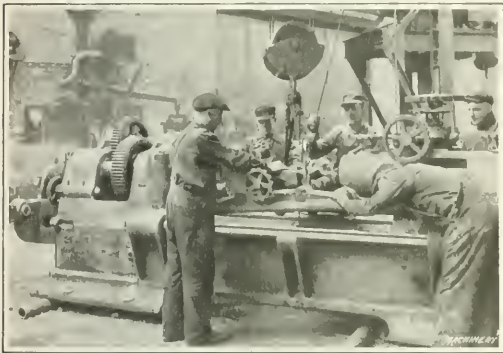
Assembling Carriage onto Lathe Bed. Attention is called to Design of Carriage
